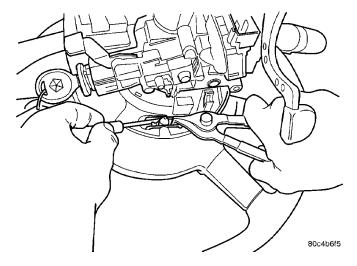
SECOND DRIVER AIRBAG RETAINING PIN - REMOVAL
